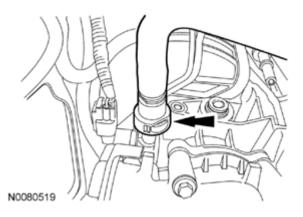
Locating Fuel Vapor Return Tube Courtesy of FORD MOTOR CO.
